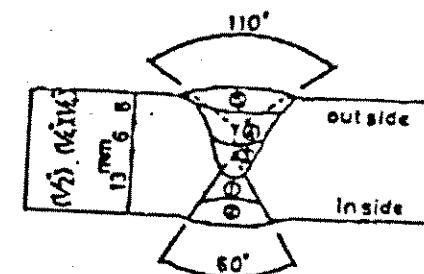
Welding Procedure for A 710 & QT 80
